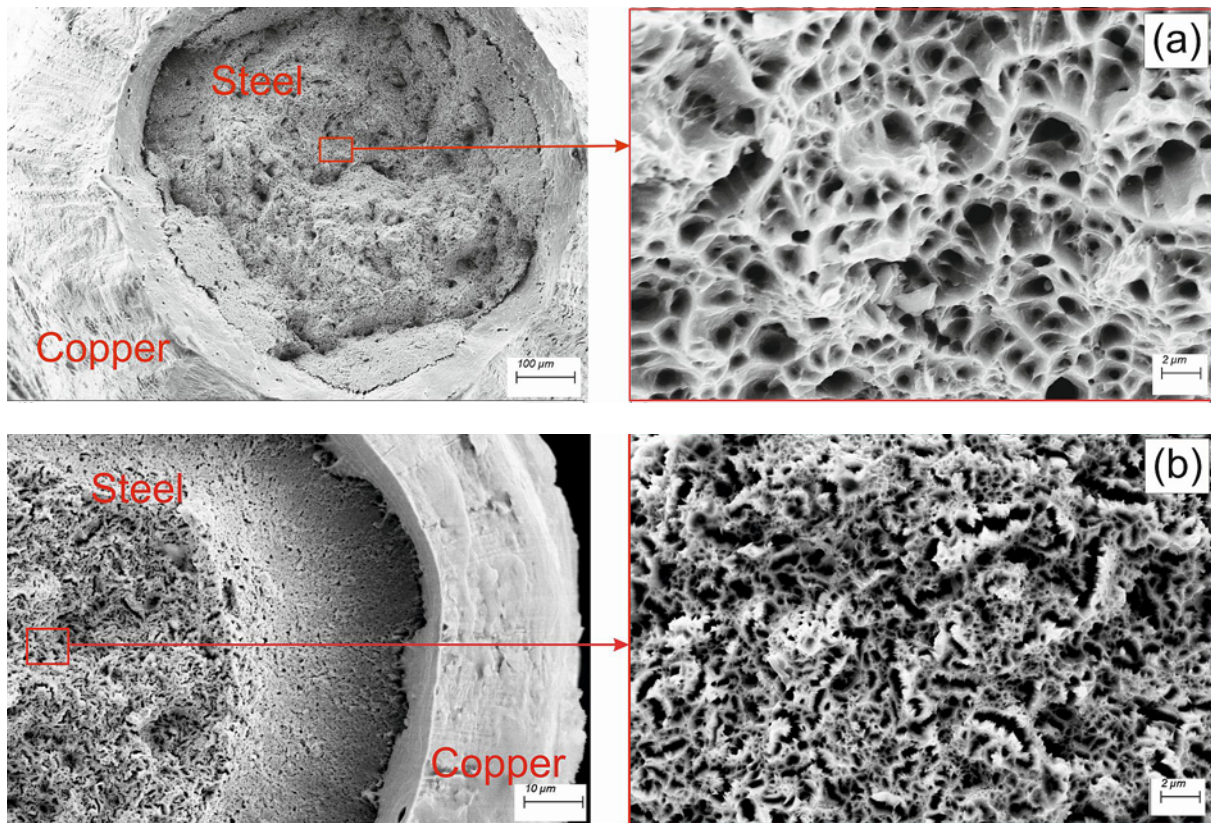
SEM micrographs of the fracture surfaces of the wires drawn to fracture after cold-drawing (a)  $\varnothing$  1.50 mm and (b)  $\varnothing$  0.20 mm.
